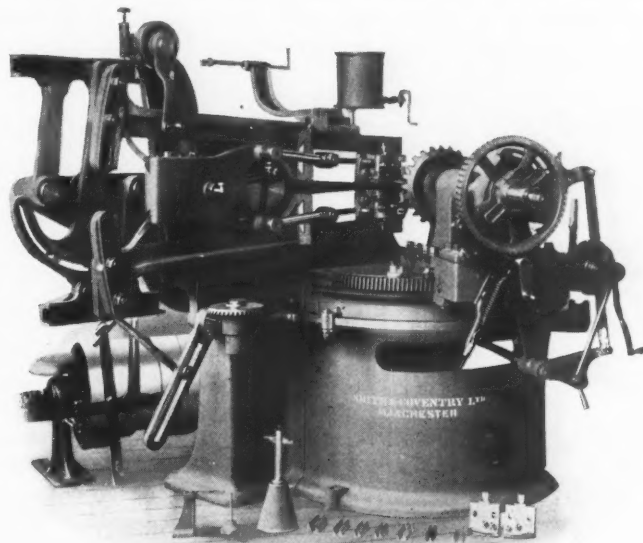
Robey-Smith Bevel Gear Planer with Improved Indexing Mechanism
